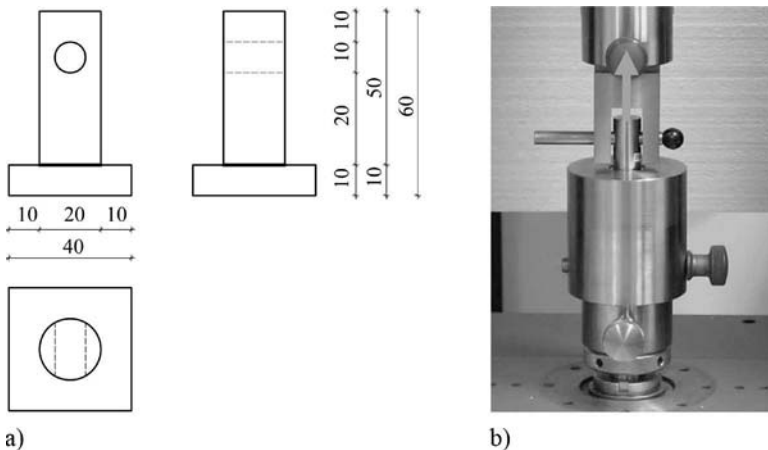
Test specimen used to investigate tensile strength before and after aging: (a) schematic drawing of test specimen with dimensions in millimeter; (b) specimen placed in the testing machine.
